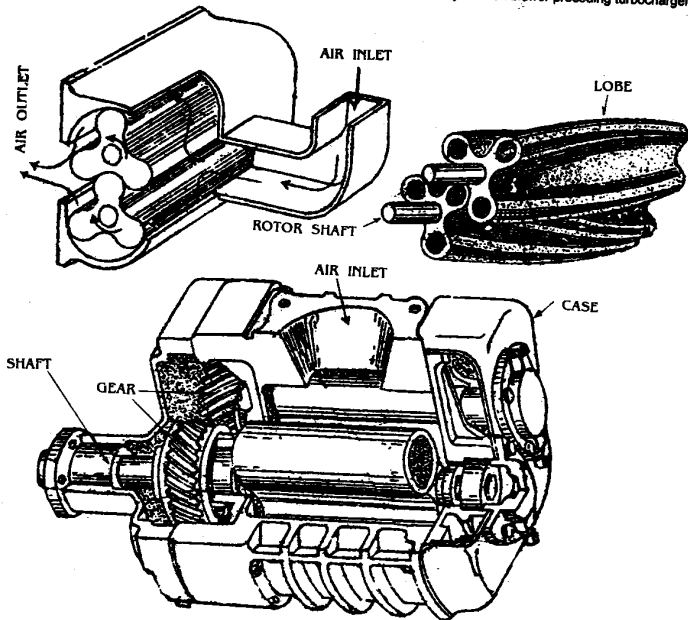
Sectioned rotary blower note bonded rubber grid on end-plates to leakage at rotor ends.
